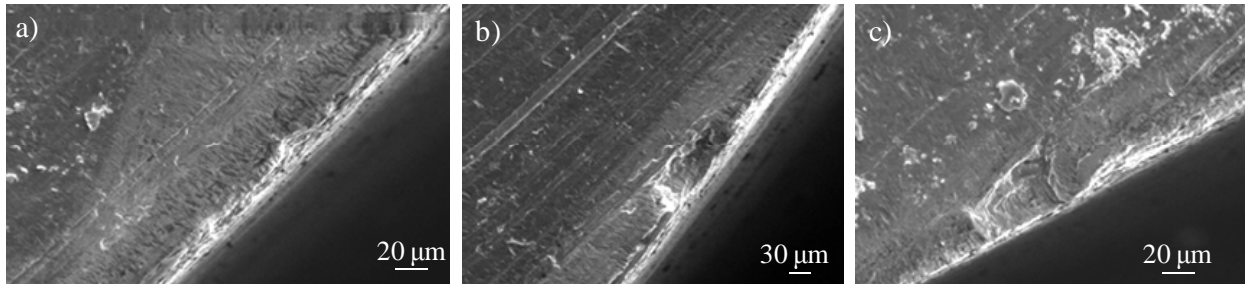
Fractography of a K360 punch after 5000 strokes: a) wear at the cutting edge; b) and c) chipping at the highly worn areas and fracture following machining grooves
